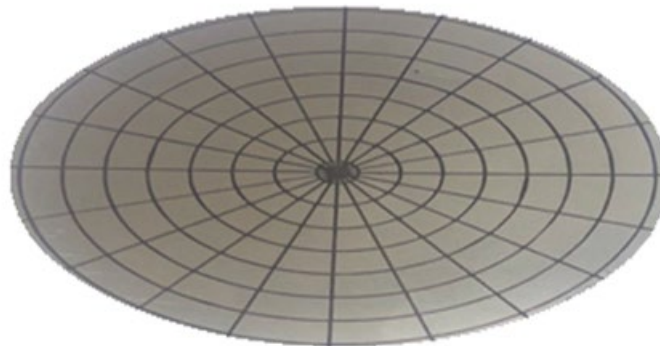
Circular grids pattern on the blank surface by utilizing a fiber laser machine
